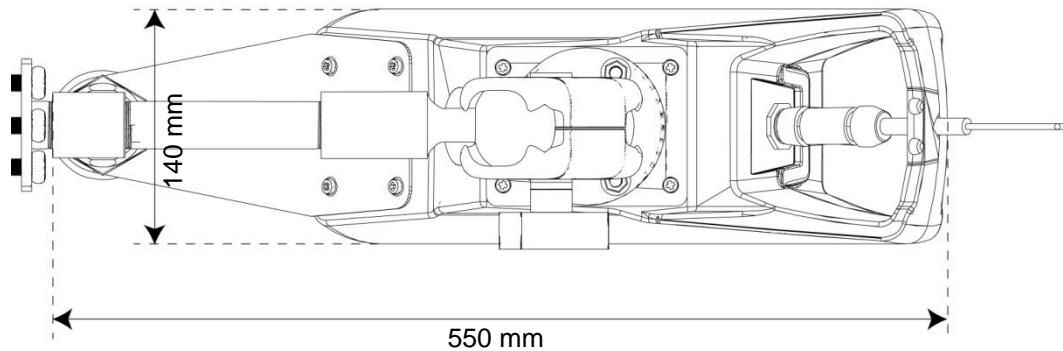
RAVEN-EYE® sensor dimensions top view with level sensor as installed
